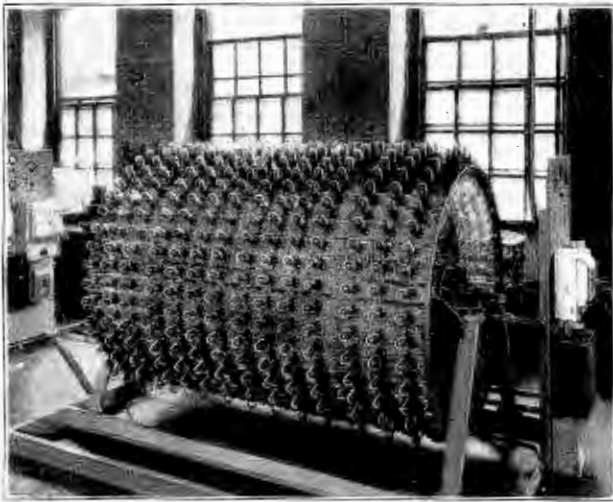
This rotary aging machine automatically subjects every Eveready Raytheon tube to form nine to fifteen different voltages and conditions. Every tube is tested and any weakness which has developed causes the tube's rejection
